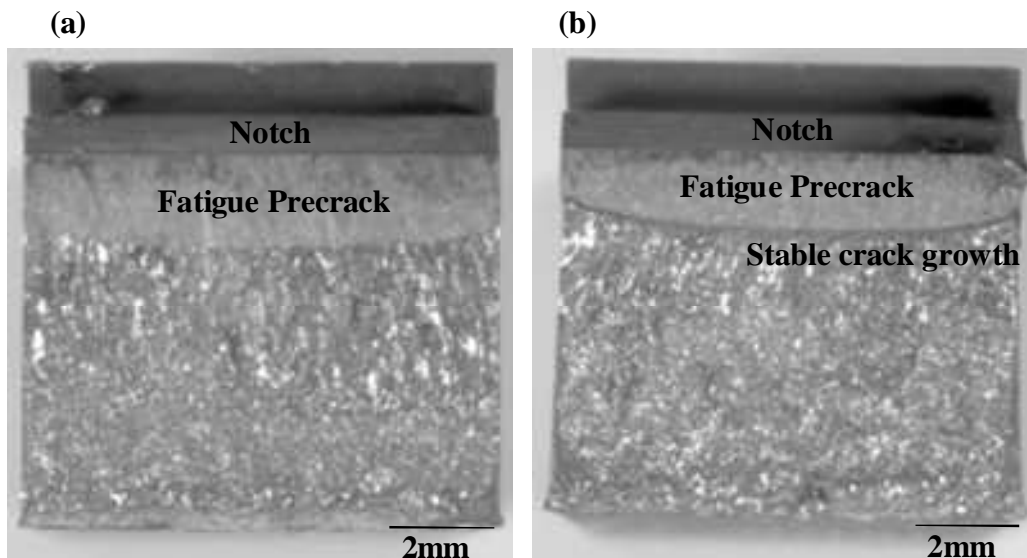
Macroscopic appearance of selected RH specimen (a) tested at -120°C, exhibiting no stable crack extension. (b) tested at -60°C exhibiting a small amount of stable crack extension.
